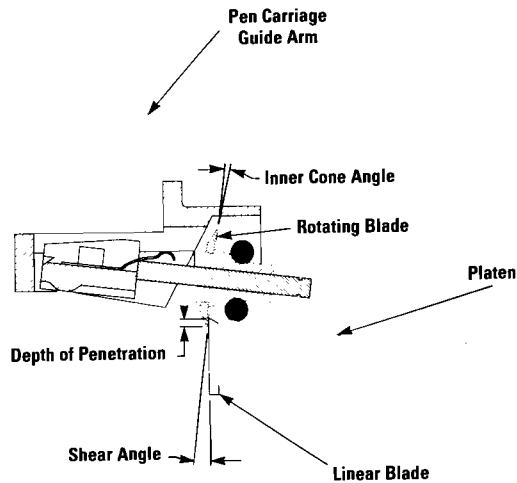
Design parameter definitions for the cutter, which is a classical rotating and linear blade design.
